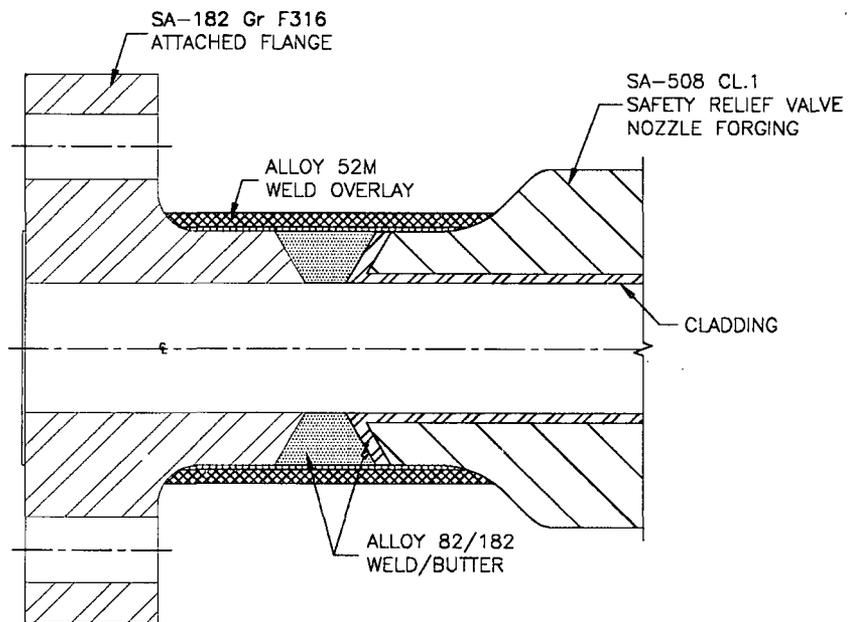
Pressurizer Safety/Relief Valve Nozzle Weld Overlay (Typical)
